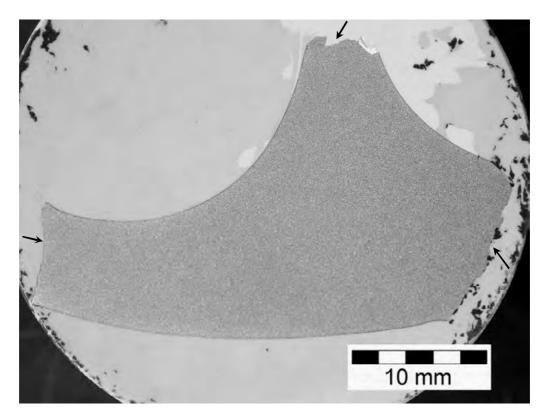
Macrograph, showing three fracture sites (arrowed) in the prepared metallographic specimen.
